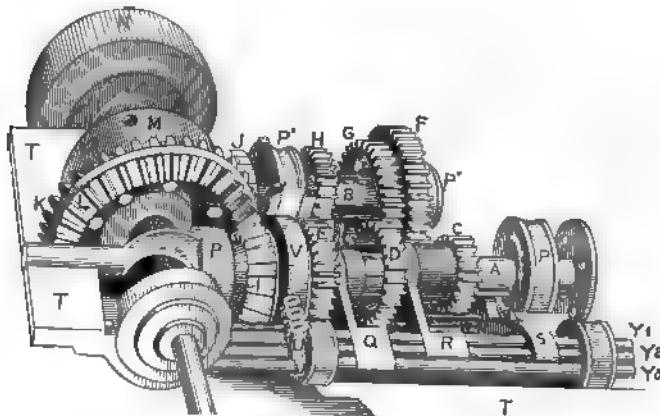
The Knox Mercedes Selective Finger Transmission, showing method of shifting gears by three shifter bars, Y_1 , Y_2 , Y_3 , and of driving through two bevel gears to the jack shaft.
